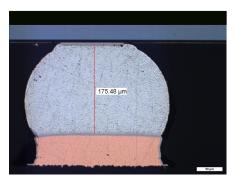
Cross section of a solder ball (epc611 on top of a fine-line PCB)
